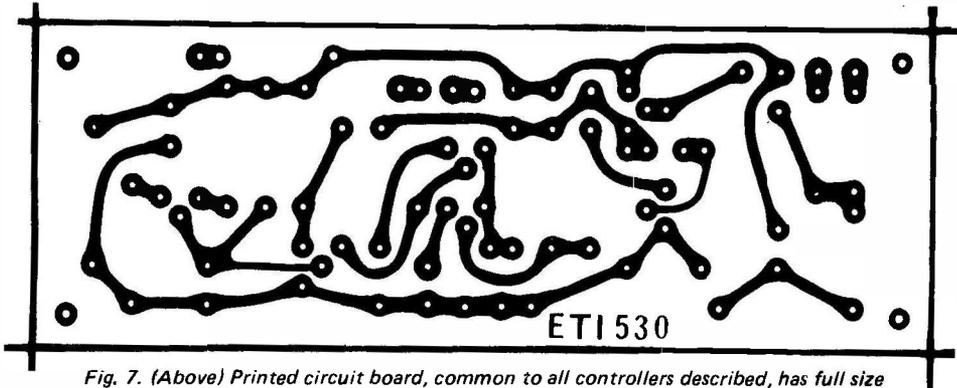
(Above) Printed circuit board, common to all controllers described, has full size dimensions of 120 x 41mm.
